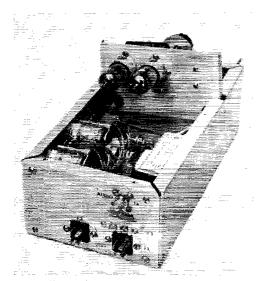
The subchassis is mounted through slots cut in the chassis lip and held in place with sheet metal screws.
